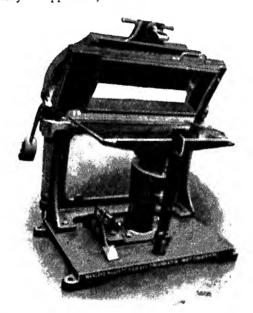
Cake Moulding Machine with Hydraulic t vinules
